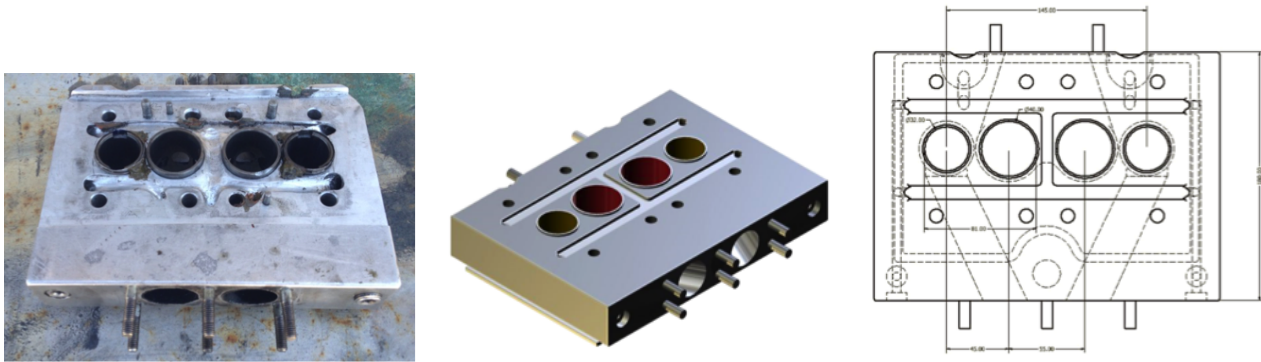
Cylinder head: (left) Real; 3D model (center); drawing with dimensions (right).
